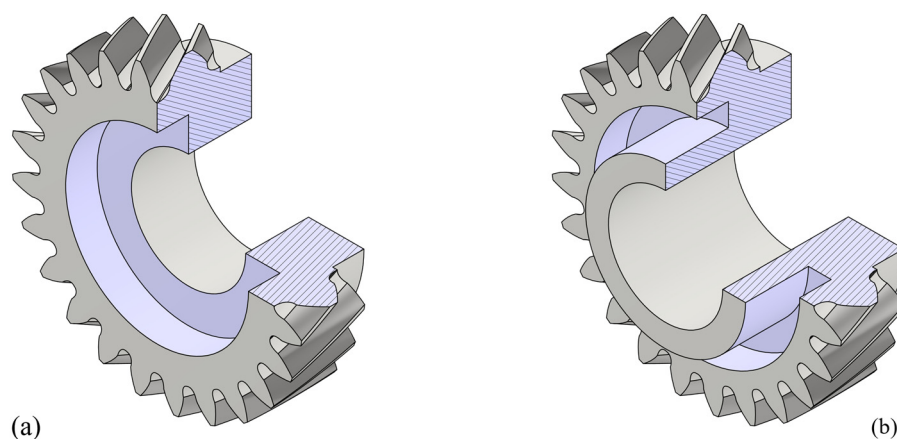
Examples of not-feasible gear body geometries. (a,b) are two possible geometries with a different position and size of the sensor board.
